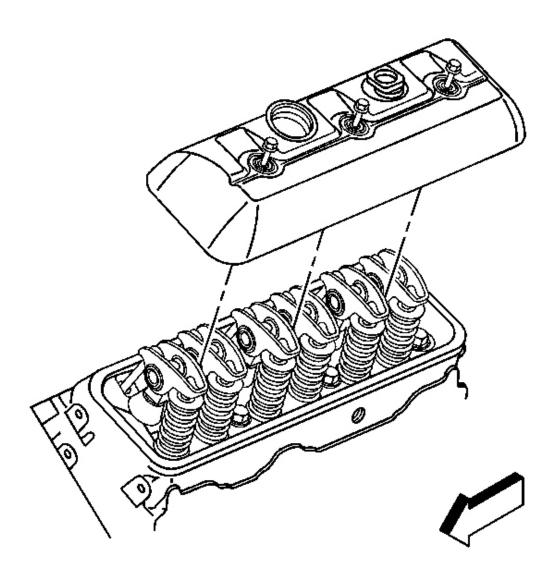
Rocker Arm Cover Courtesy of GENERAL MOTORS CORP.
